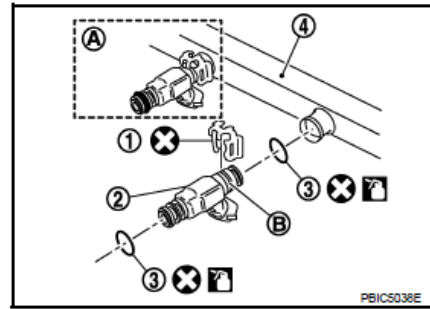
Identifying Fuel Injector And Fuel Tube Components
